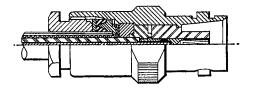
C—Assembly instructions—BNC Type plugs and sockets—Captive contact
